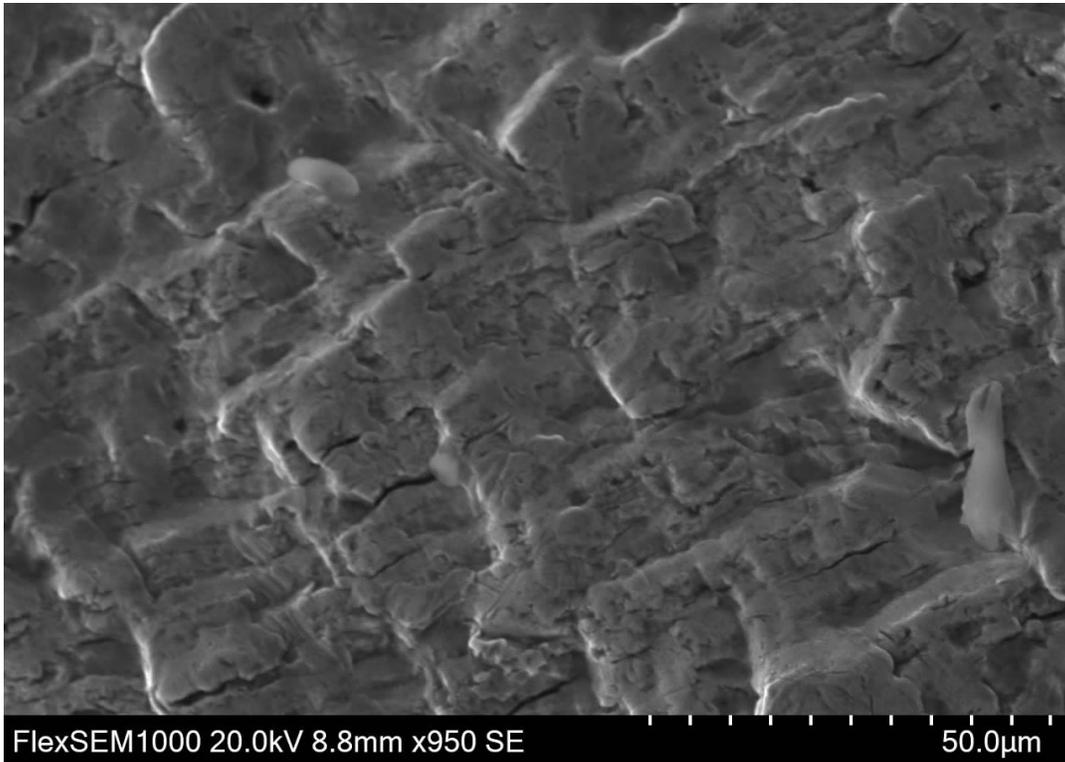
CLOSER VIEW OF BURNISHED FRACTURE FEATURES 12 O'CLOCK REGION, BOLT C2
